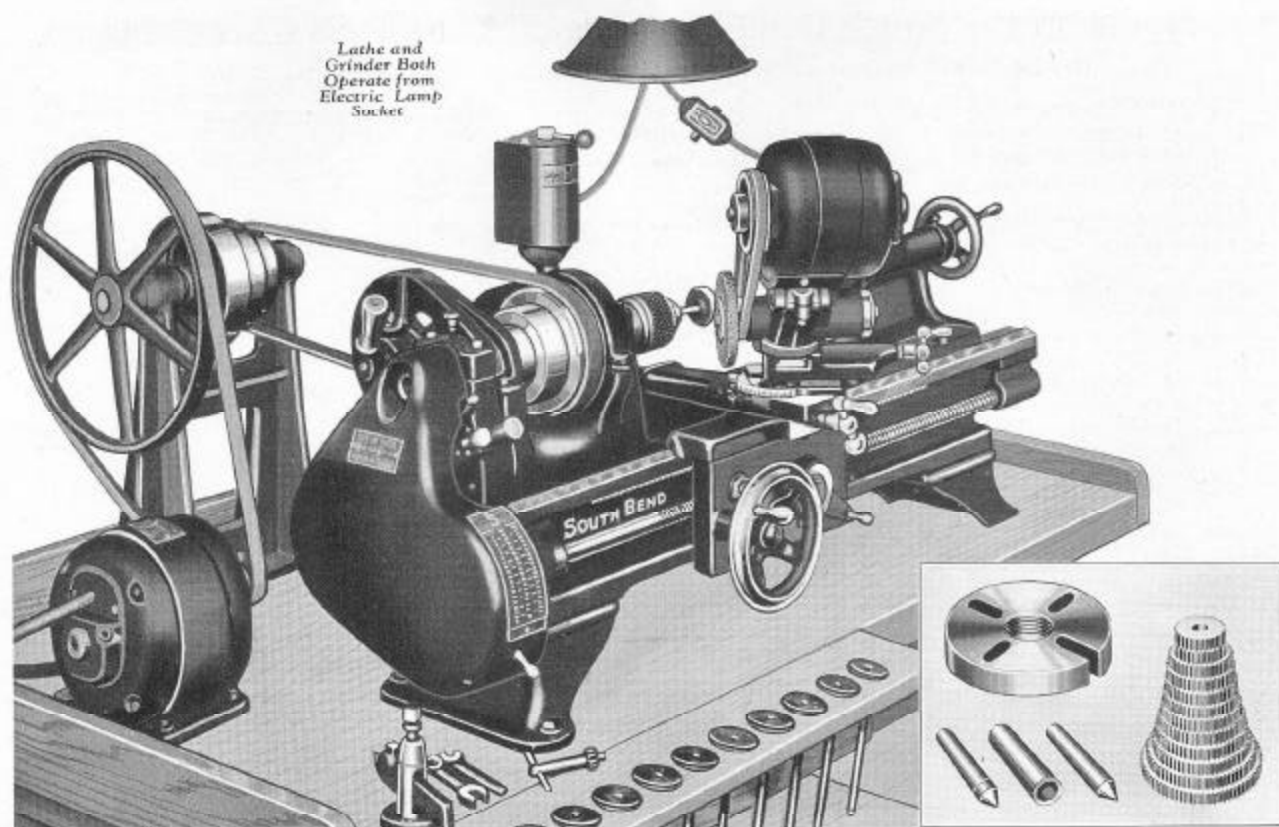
The New 9-in. x 3-ft. Junior South Bend Electric Valve Grinding Lathe in Operation Refacing a Valve. Small Illustration Shows the Face Plate, Change Gears, Lathe Centers and Spindle Sleeve as listed in Regular Equipment for Lathe.
